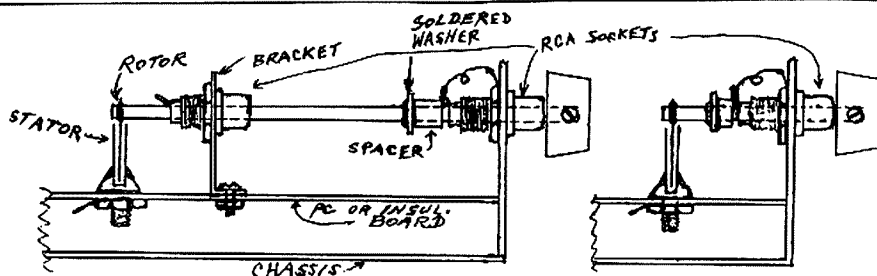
RCA Socket — Panel (screw mount) cat no P1430 — Dick Smith.
